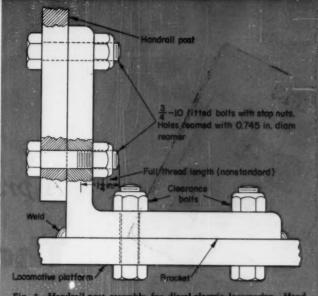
Handrail-post assembly for diesel-electric locomorive. Handrail post is fastened to bracket by two cold-formed body cap screws used as fitted botts. Thread length is shorter than standard to provide full bearing of bolt body at shear joint between post and bracket. Bracket is held on top plate of locomotive chassis by two cap acrews in clearance holes and is welded to top plate in assembly to take shear loads produced when cars are coupled to locomotive. In practice, the holes for the fitted bolts are drilled about 0.015 in, smaller than the reamer which has a diameter 0.005 in under nominal bolt size. Reaming usually provides a hole slightly larger than the reamer. In assembly, bolts are hammered home and stop nuts are tightened. Ramp between bolt threads and body aids driving and tightening operation; no lubricant is used beyond oiliness of bolts as received.
